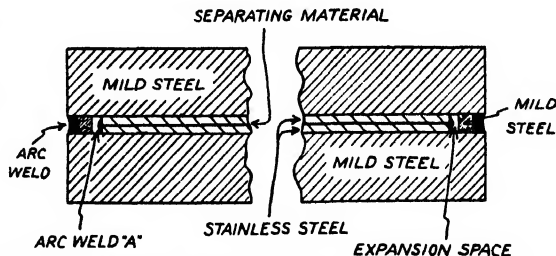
Assembly ready for heating, rolling, and welding.
